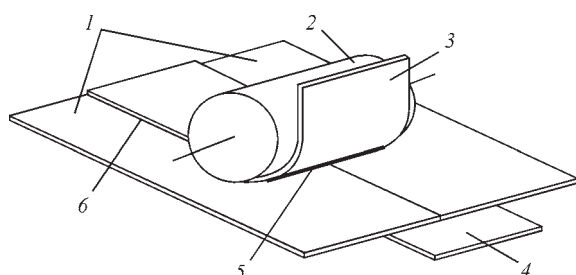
Scheme of optimal process of hot air welding of laminated fabric: 1 — laminated fabrics being welded; 2 — press-down roller; 3 — connecting tape from laminated fabric; 4 — backing tape from laminated fabric; 5 — PVC melt that forms during welding; 6 — PVC flash from welded joint sides
